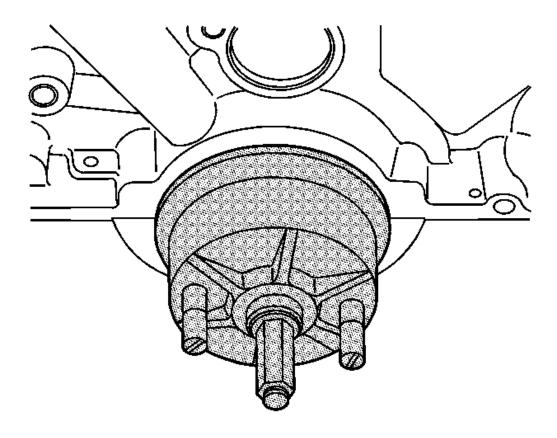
View Of J 42849 Courtesy of GENERAL MOTORS CORP.
